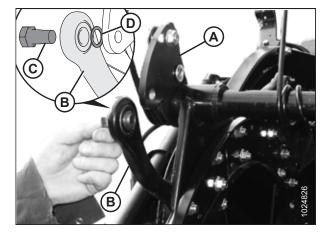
Bar Crank Attachment Holes and Link Alignment
